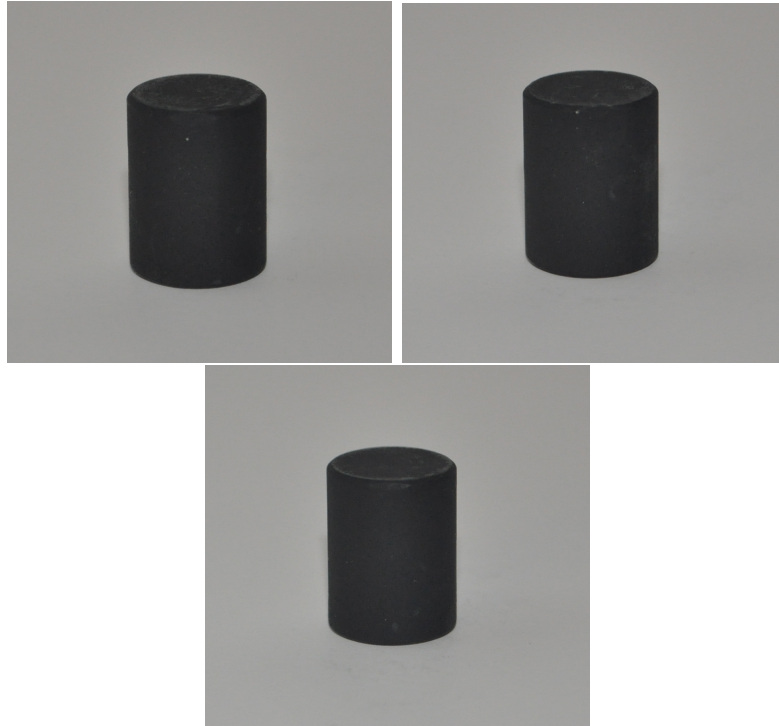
Pseudo Test Pellets with “Wheel Mark” Defects: Pellet 1 (Upper Left), Pellet 2 (Upper Right), Pellet 3 (Bottom)
